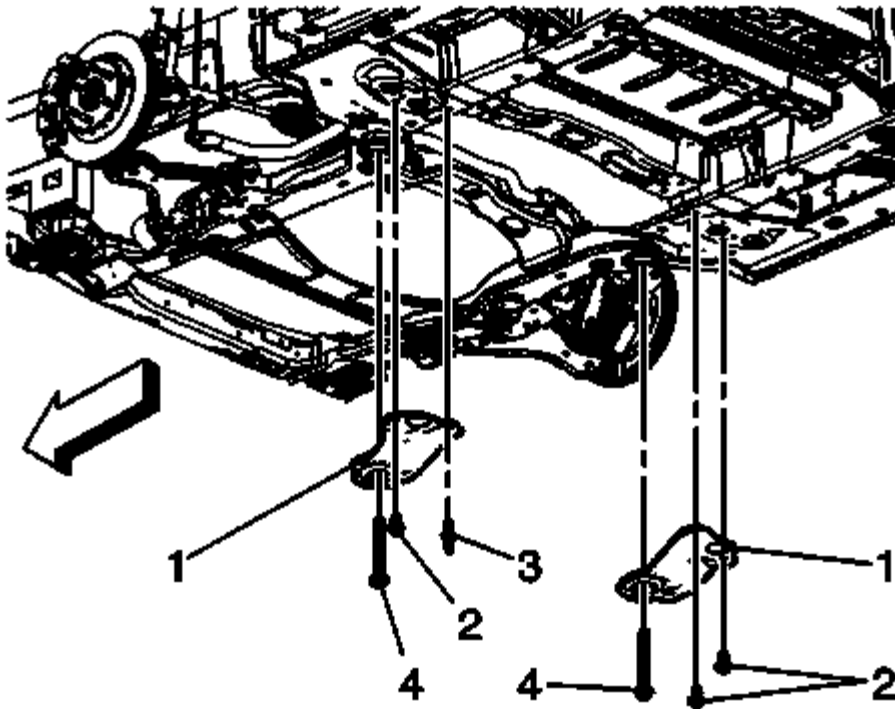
Locating Reinforcements, Frame To Body Bolts, Reinforcement Bolts & Studs
